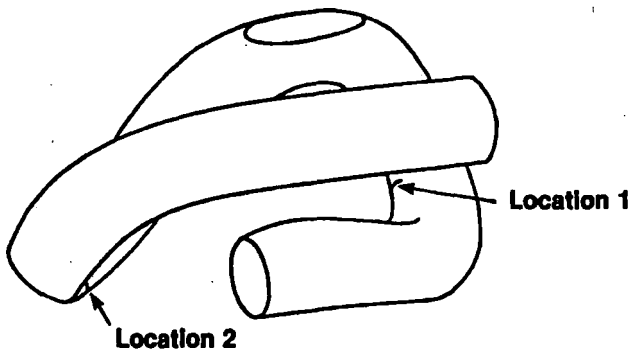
CONCRETE TIE FASTENER FATIGUE TEST CLIP CRACKS.
